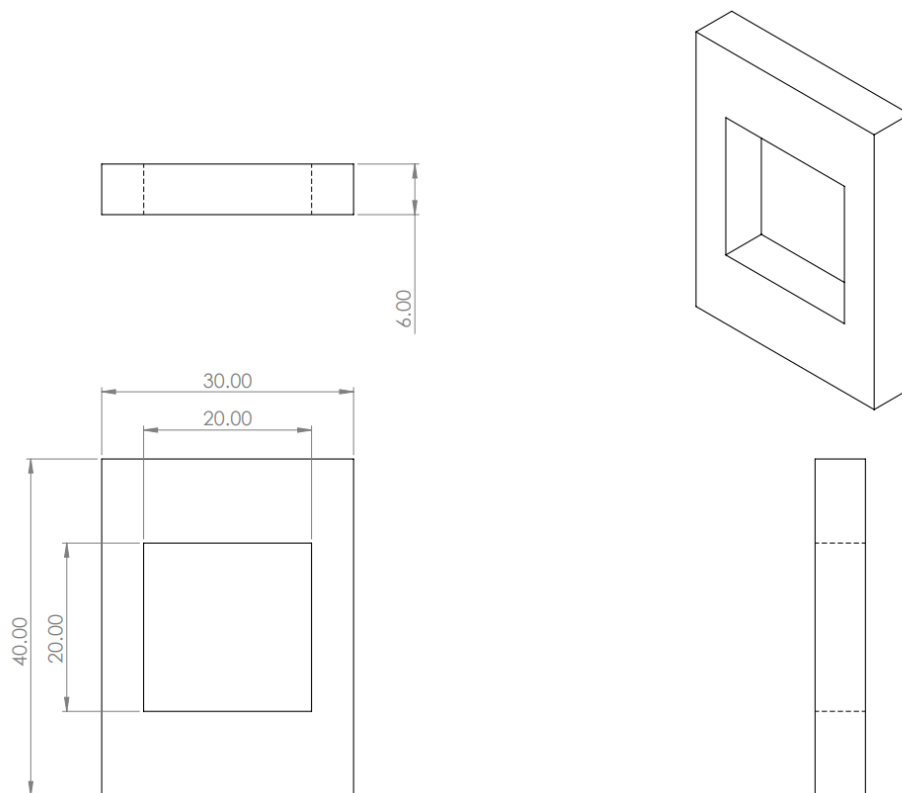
Dimension of AAB Casing (Front & Back) in mm
